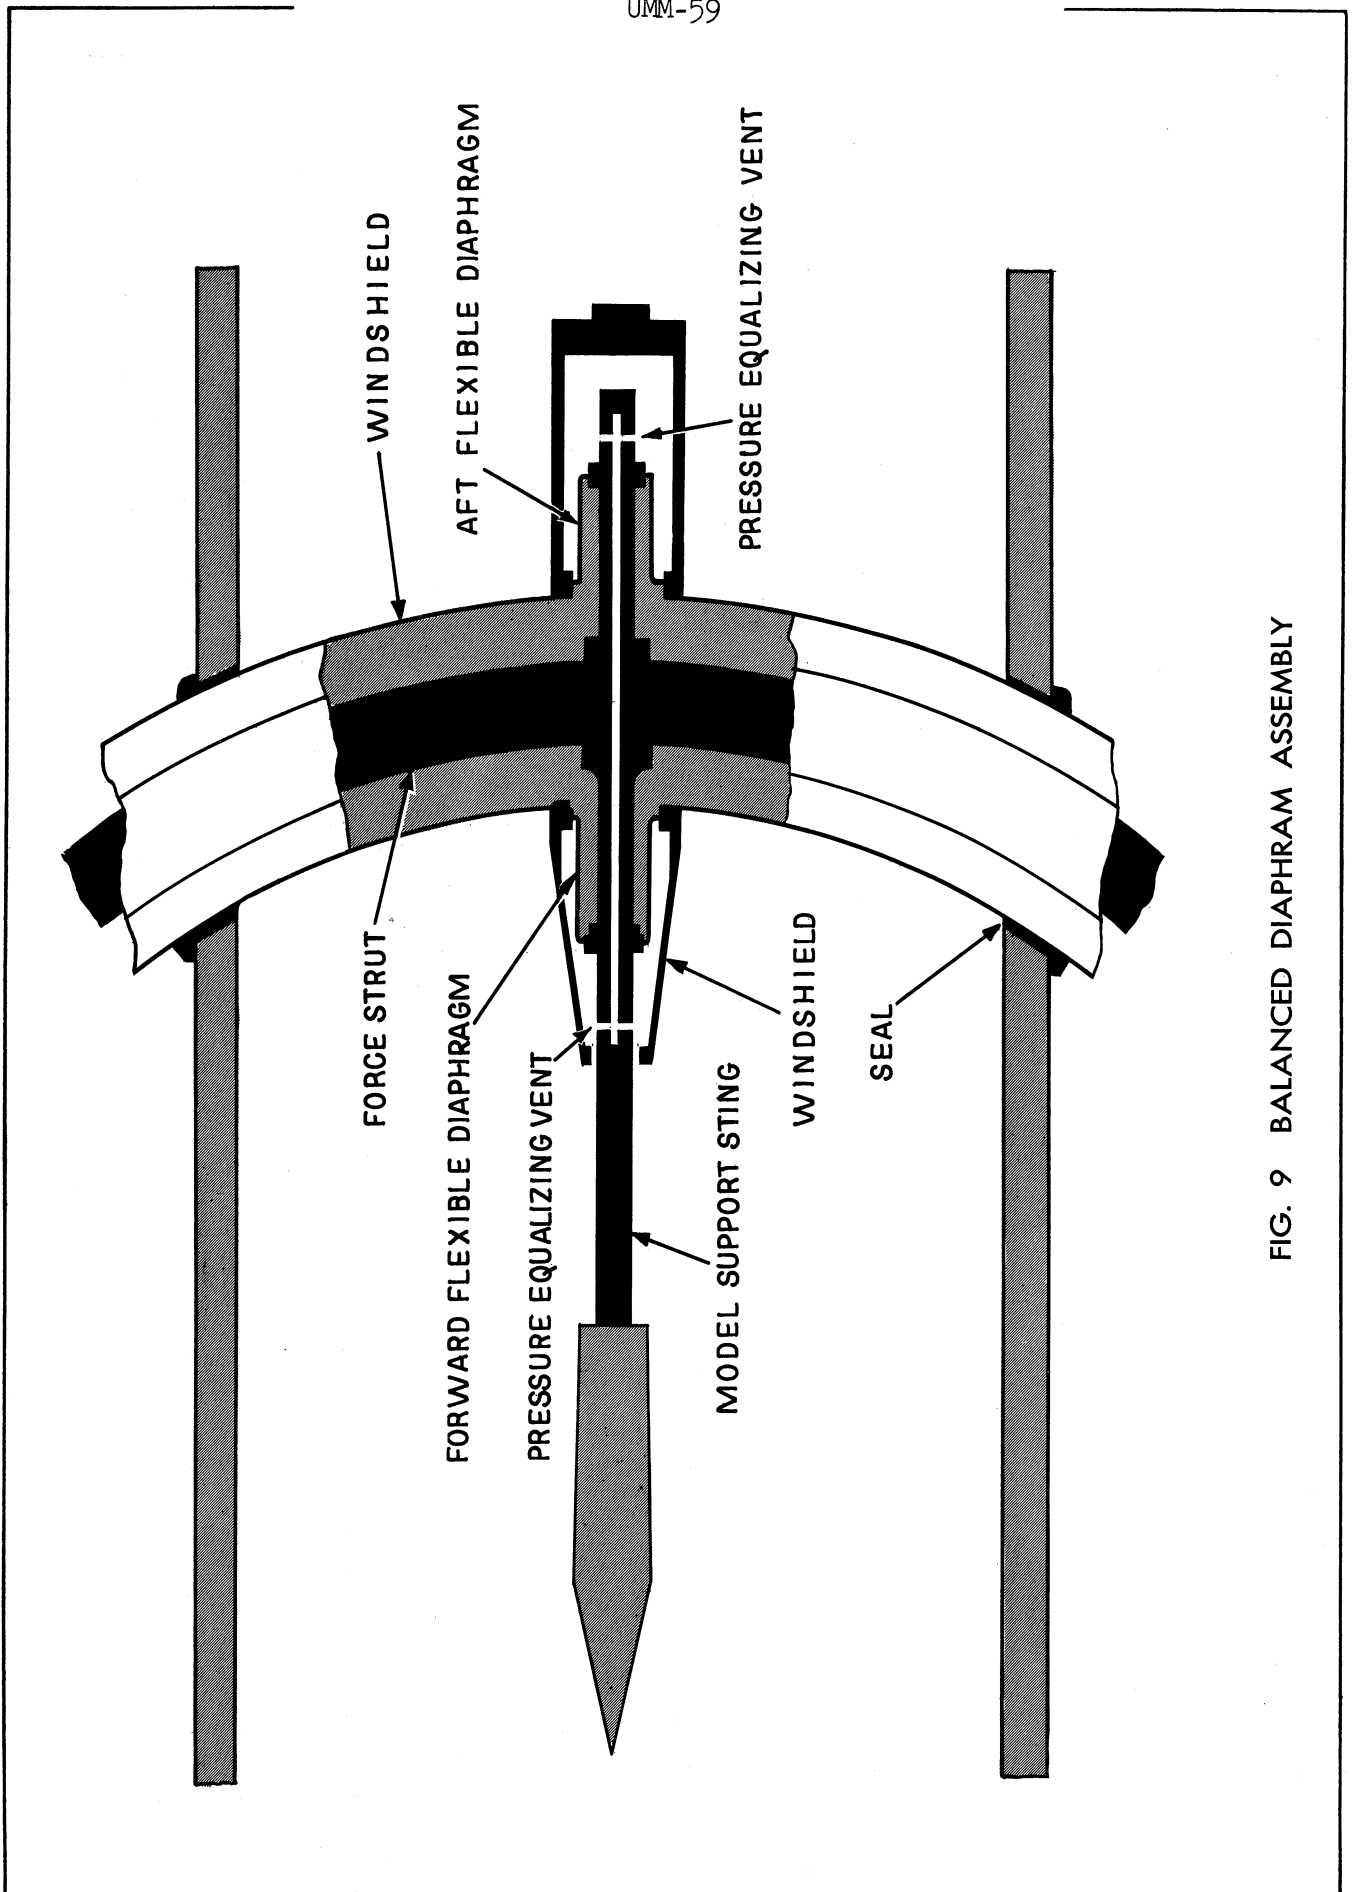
BALANCED DIAPHRAM ASSEMBLY
